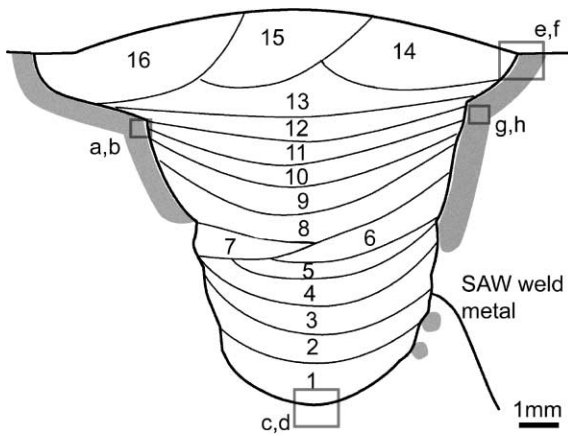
Build-up sequence and regions of welding defects (shadow) in a cross-section of the 1 MJ/m build-up welded specimen, as obtained by cross-sectional observation using optical microscopy. Squares indicate the observation areas for micrographs shown in Fig. 3.
